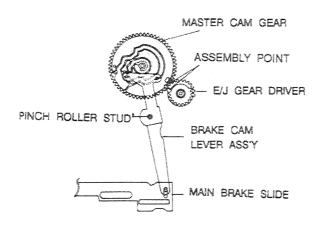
Brake Cam Lever, Eject Drive Gear and Master Cam Gear Assembly
